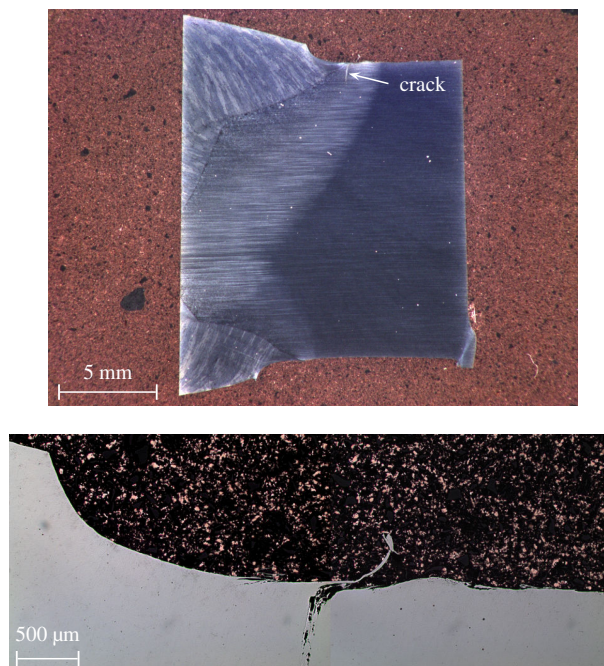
Microstructure of a S690QL butt-welded assembly treated by HFH and detail of the crack initiation zone at the bottom of the groove.
